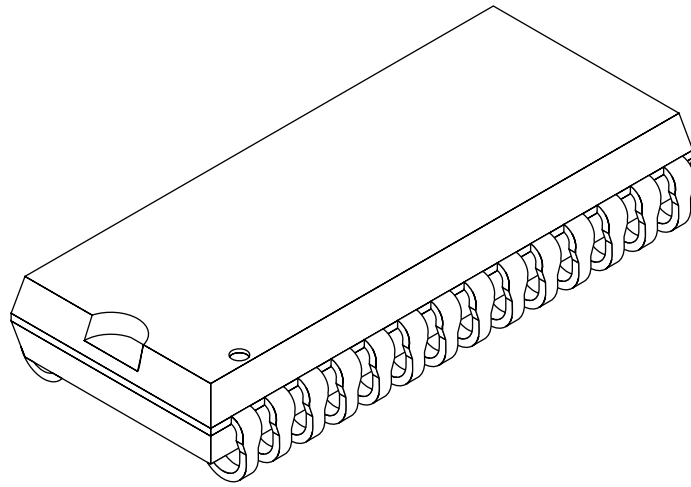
28-Pin 300 mil SOJ Package Dimensions
